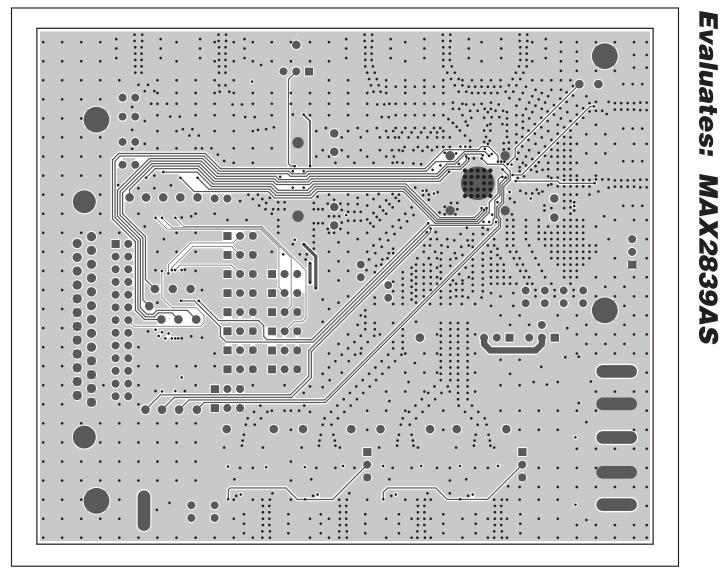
MAX2839AS EV Kit PCB Layout—Inner Layer 3, Routes
